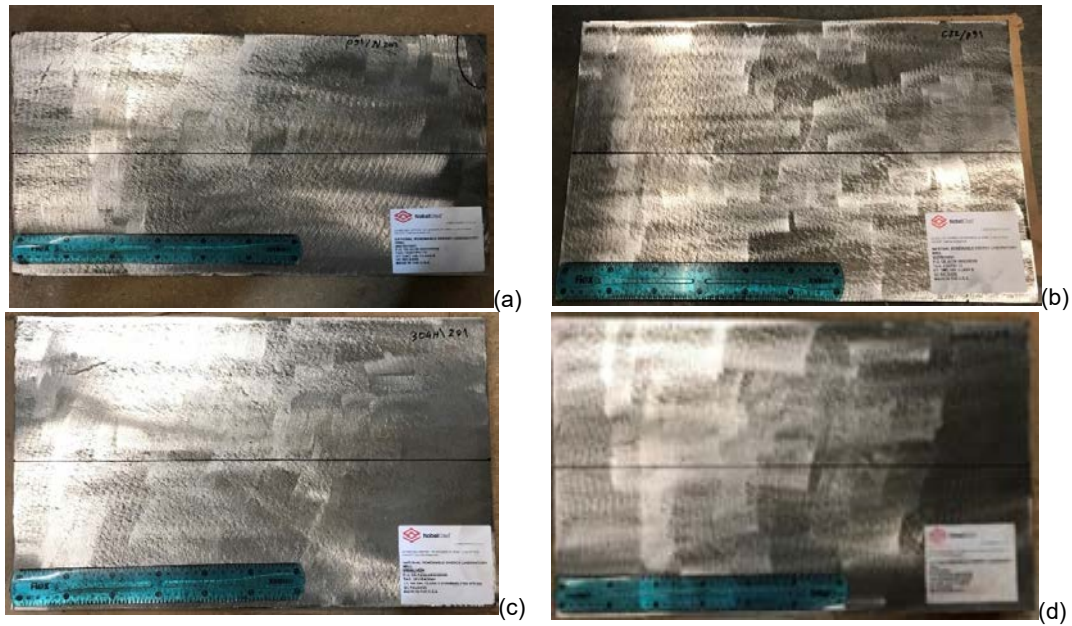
As-received explosion-welded clad plates showing the cladded surface: (a) Ni201// P91-class 2, (b) C-22 // P91-class 2, (c) Ni201 // SS304H, (d) C-22 // SS304H
